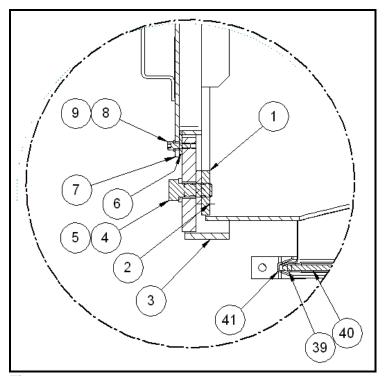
Final Assembly, Detail D, WWF60-5L (Per Figure 4-9)
